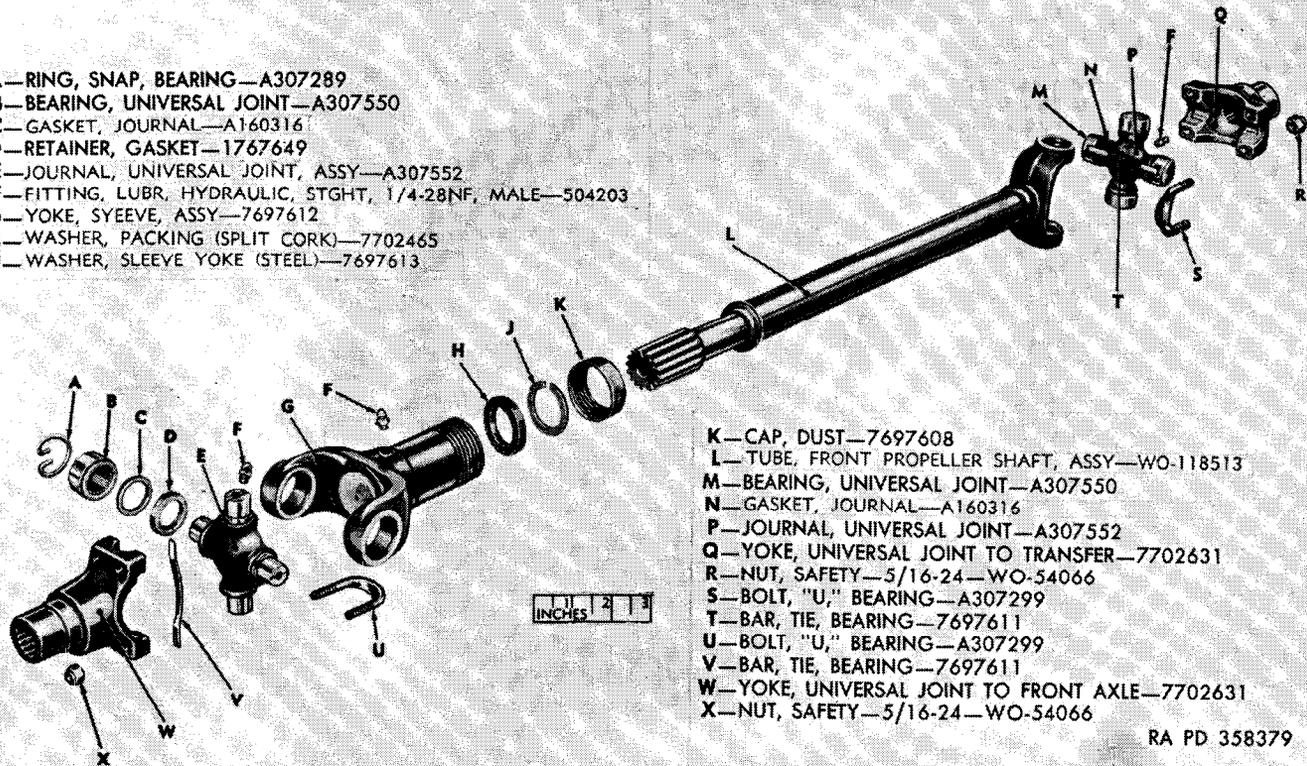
Front propeller shaft (U bolt type)—exploded view.
